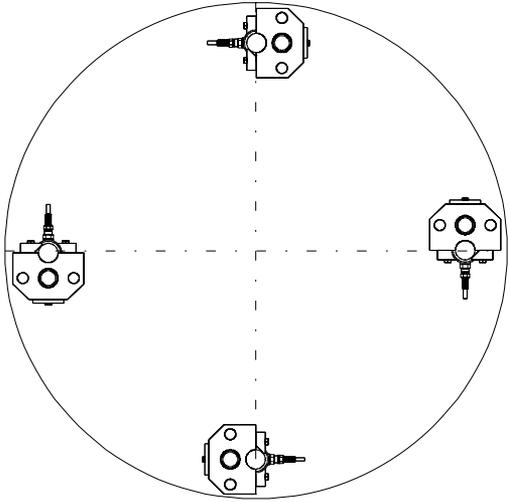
ROUND VESSEL TANK - 4 LOAD POINT ASSEMBLIES
